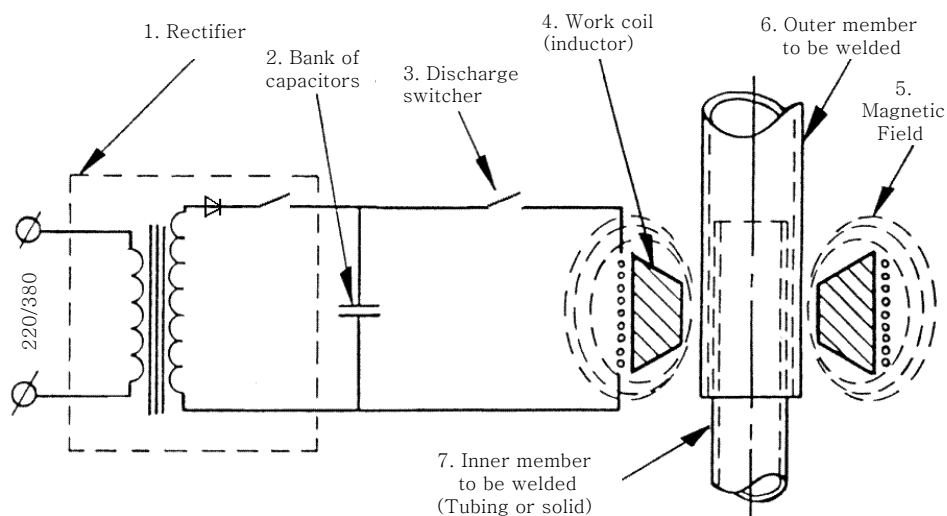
System of magnetic pulse welding⁵⁾
